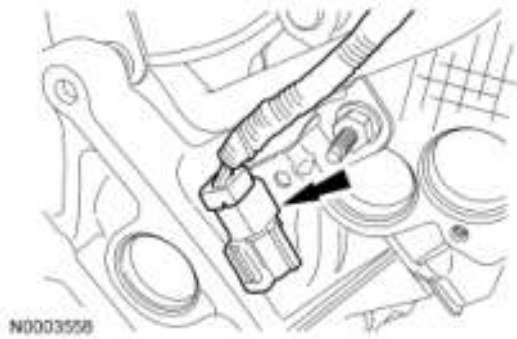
Locating Electrical Connector Retainer At Coolant Tube Support Bracket
